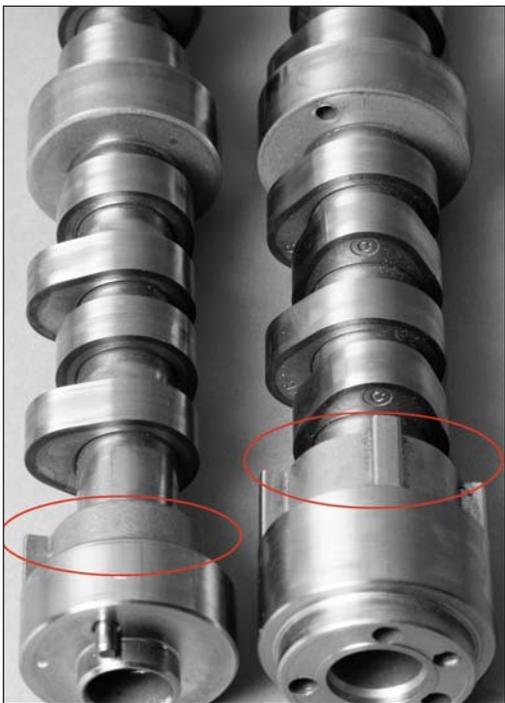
The cam for the '05-'06 Equinox (left) has one recessed area while the one for '07-'09 (right) has four notches and bigger journals.
